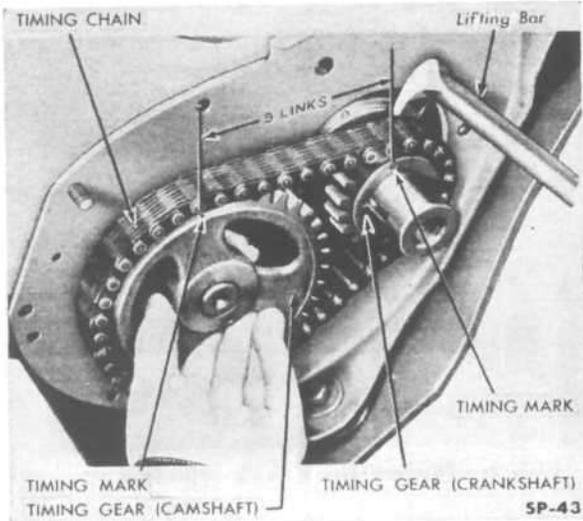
REMOVING TIMING CHAIN AND GEARS
